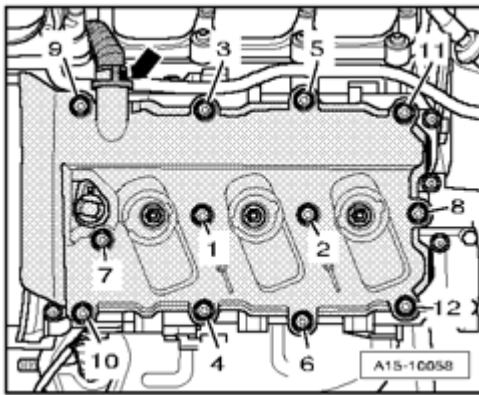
Removing Crankshaft Housing Ventilation Hose & Right Cylinder Head Cover Bolts In Sequence
